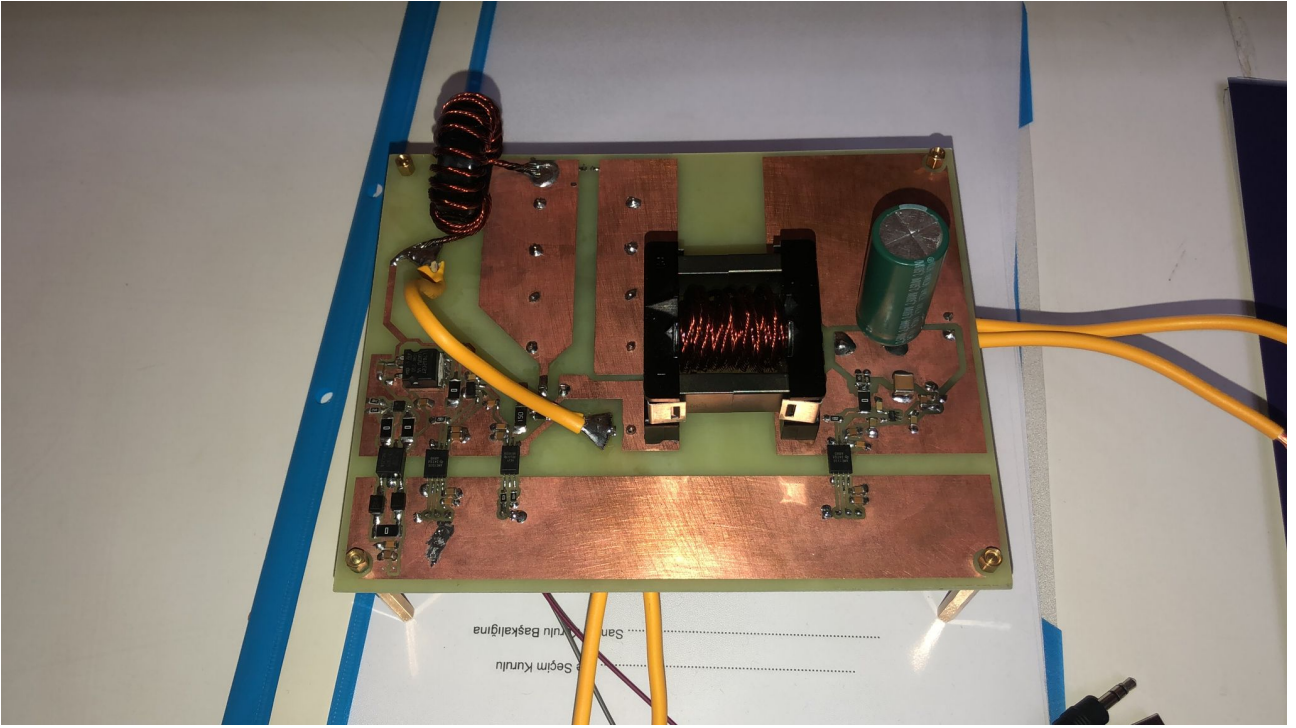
Top view of the converter, yellow wire over the PCB is the jump
